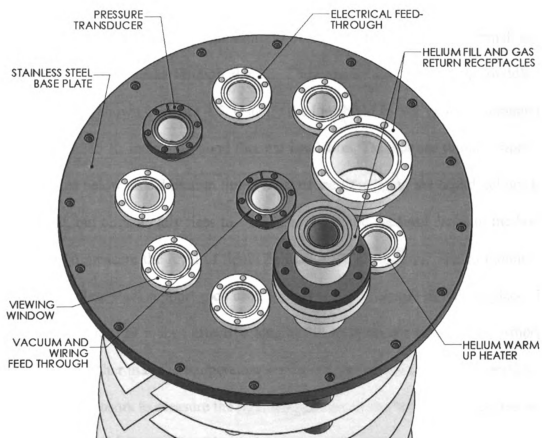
New lid assembly carrying two sample holder assemblies.
